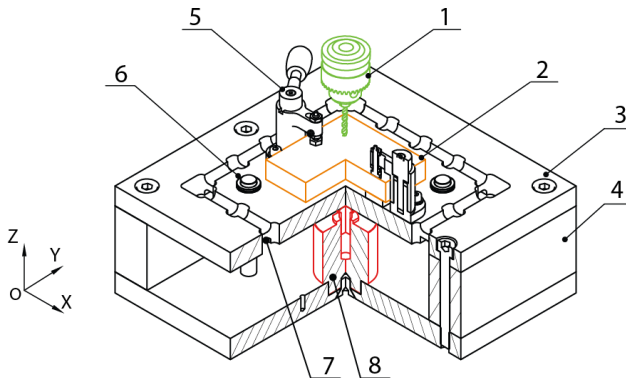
Structure of VADrill system: drill machine (1), workpiece (2), outer base (3), support (4), clamp workpiece (5), slide bearing (6), flexible hinge (7), piezoelectric actuator (8)
